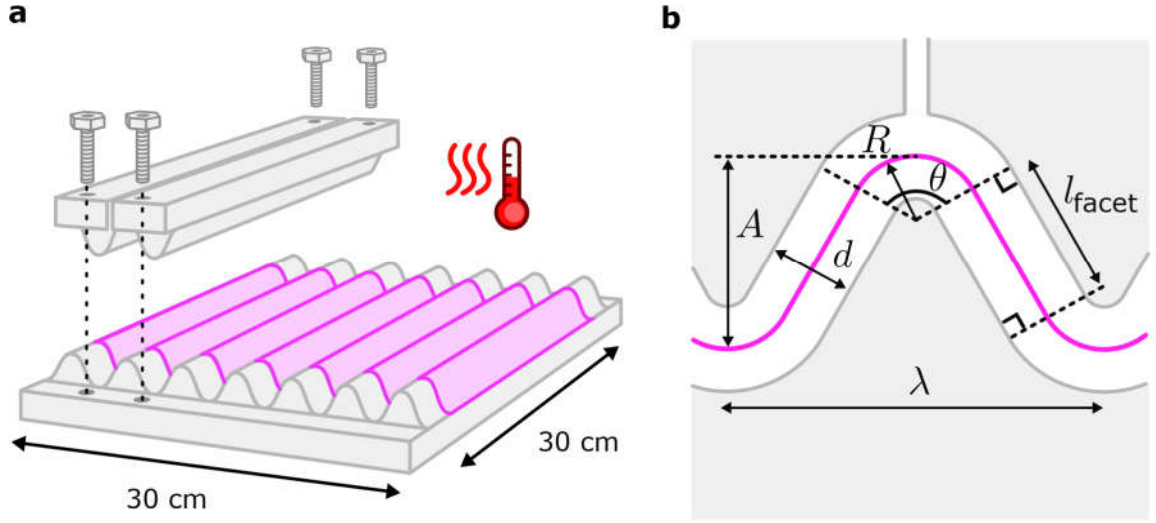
Static thermoforming with a heated mould. a, Schematic illustration of the process. Flat plastic film (pink) is placed on an aluminium mould (grey) with machined grooves. Rods with a complementary shape push the film into each groove and are fastened on the mould with screws. The effective forming surface is 30 cm in each direction. The mould is heated in a commercial oven to thermoform the confined film. b, Mould groove geometry. Amplitude A , wavelength λ , mean radius R , curve angle θ , facet length l_{facet} and mould spacing d to accommodate the film's finite thickness are shown. The film's mid-surface (pink line) is indicated.
